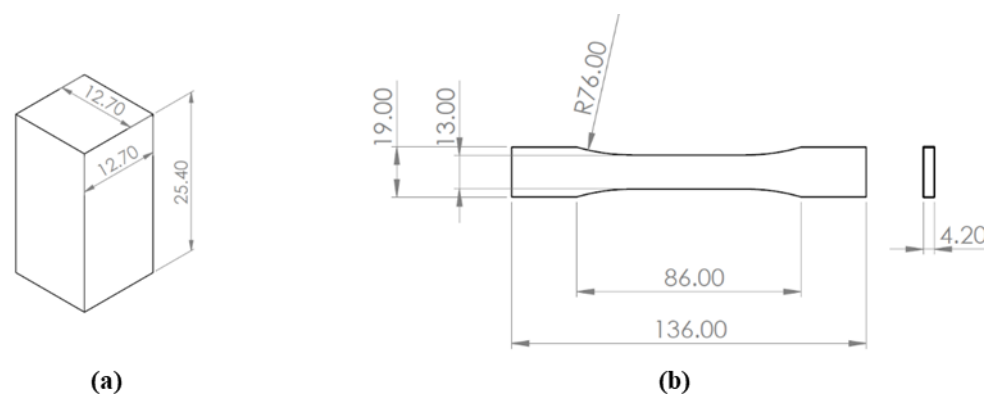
Test specimen dimensions, in mm. (a) Compression test specimen dimensions; (b) Tensile test specimen dimensions. Reproduced from [26].
